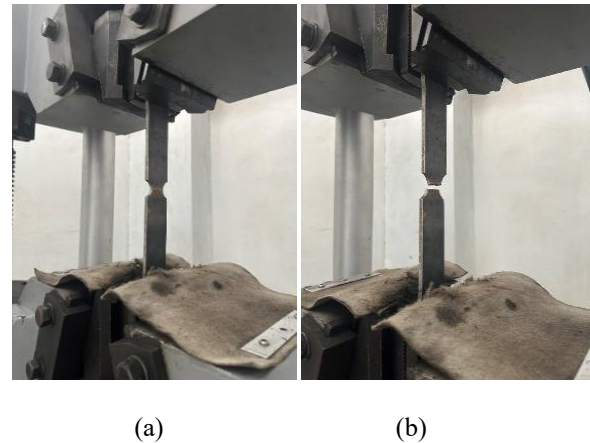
Condition of Tensile Specimen: (a) before testing and (b) after testing
